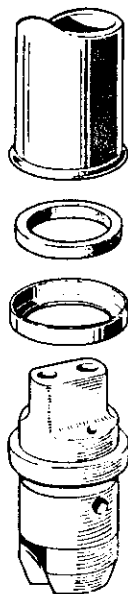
FIG. B. MODIFIED PUSH ROD COVER OIL SEAL ARRANGEMENT
